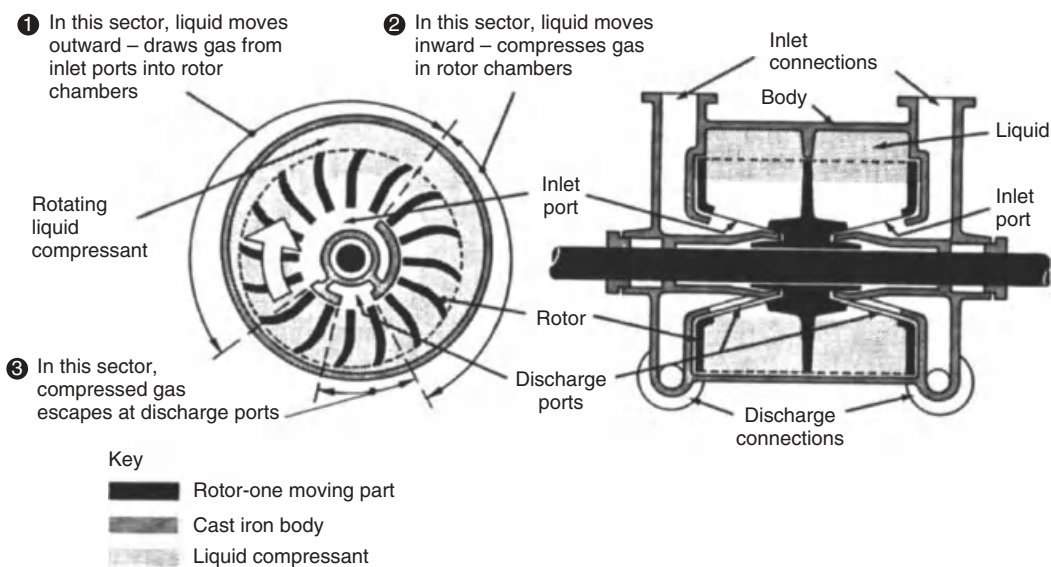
Sectional and end view of a liquid piston compressor. (Courtesy of Nash Engineering Co., Trumbull, CT.)
